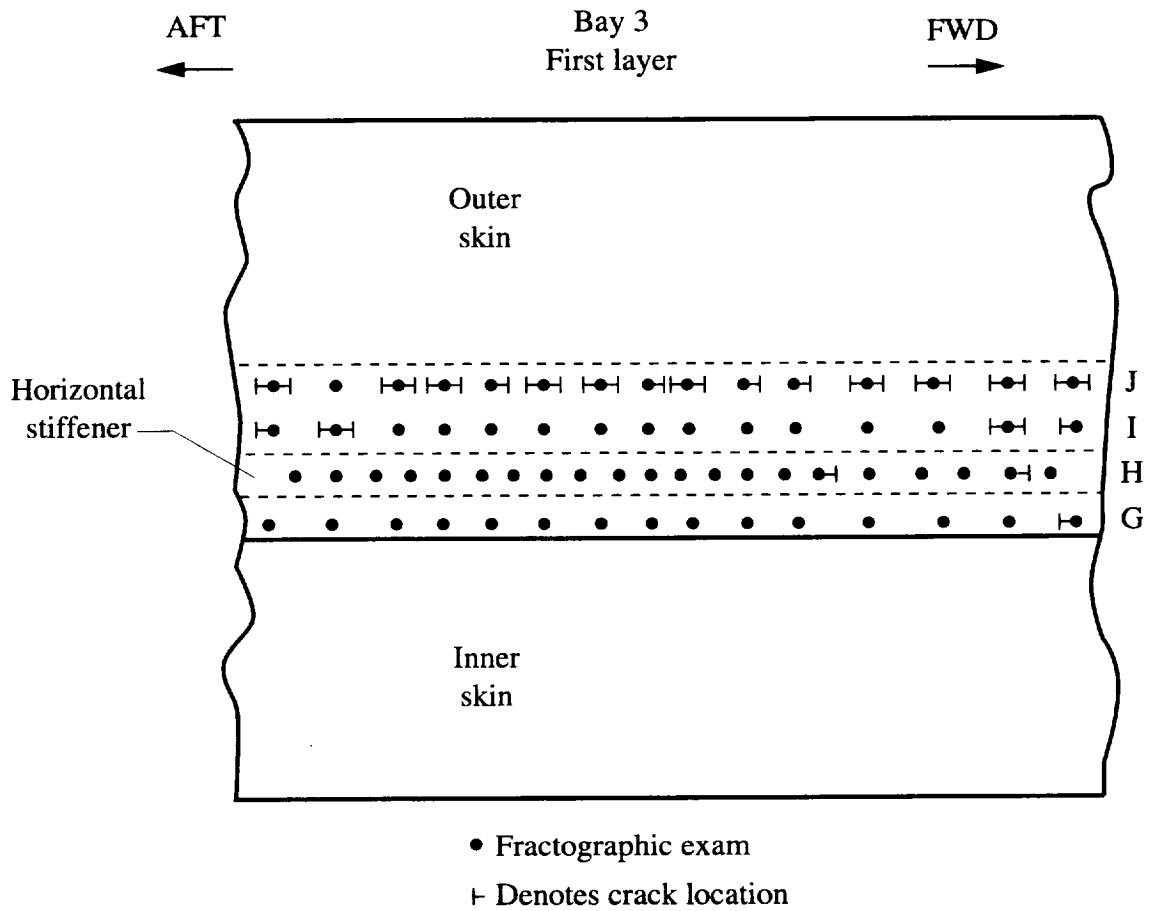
The schematic shows the location of fatigue cracks found in the first layer (outer skin) of the bay 3 lap splice joint by destructive examination.
